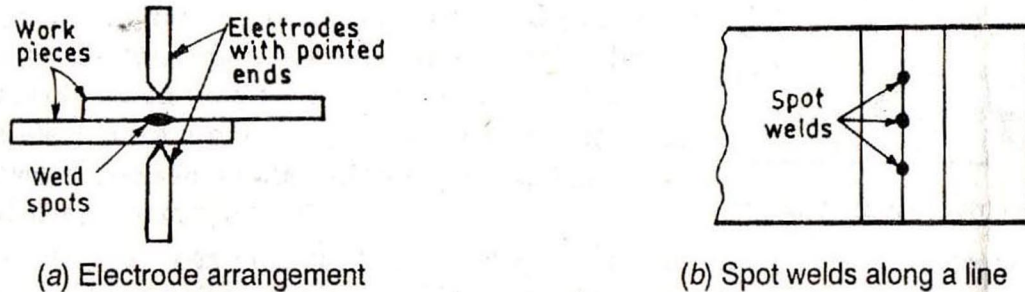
Basic electrode arrangement of spot welding.
